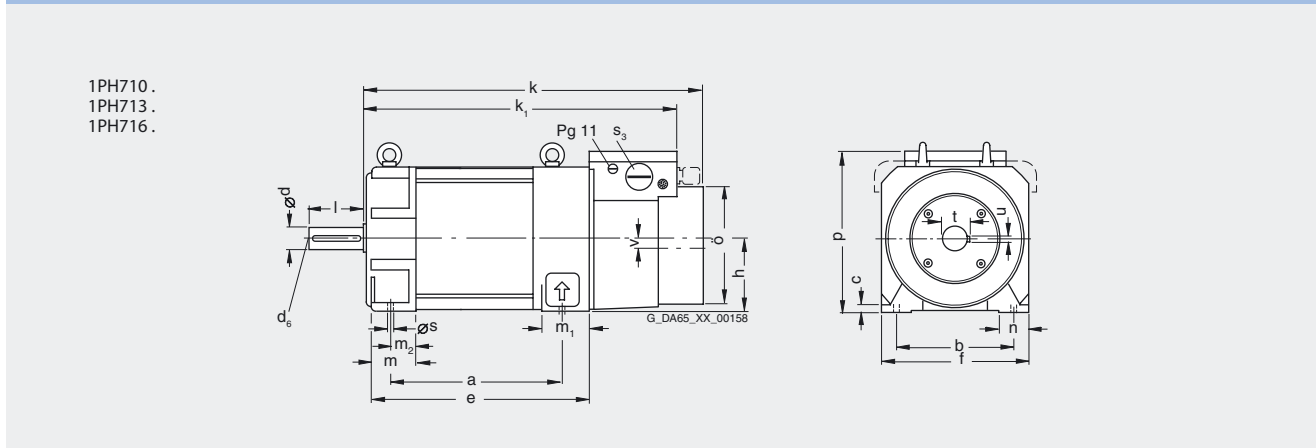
1PH7, type of construction IM B3, forced ventilation, with pipe connection, NDE
